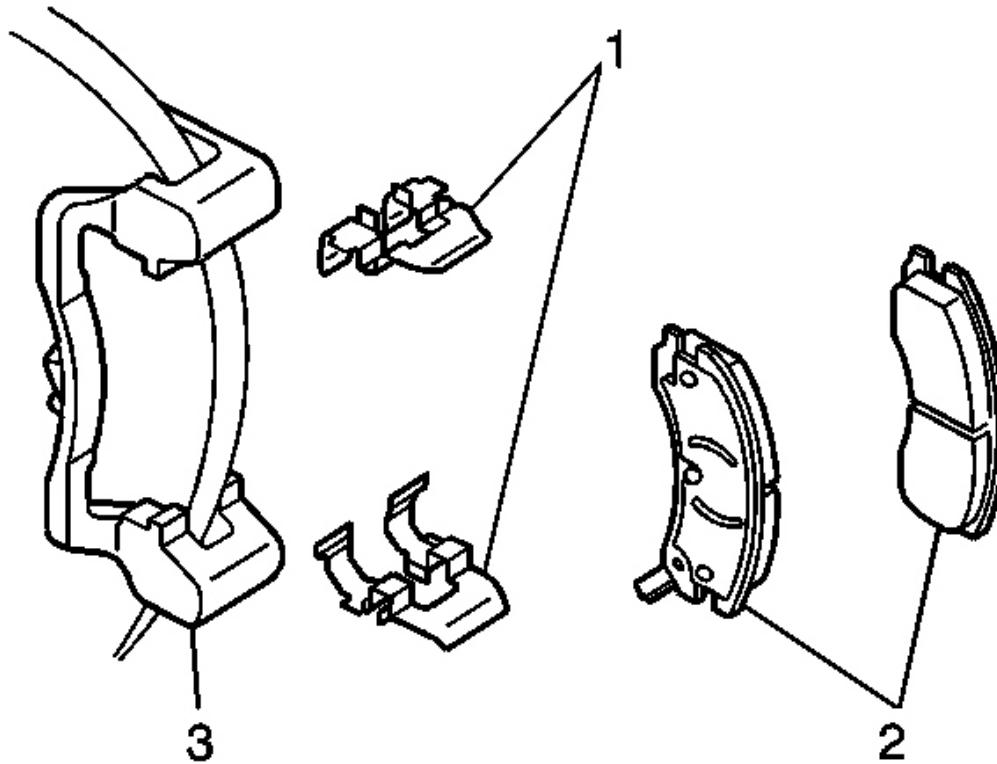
Brake Pads, Brake Pad Retainers, & Caliper Bracket
